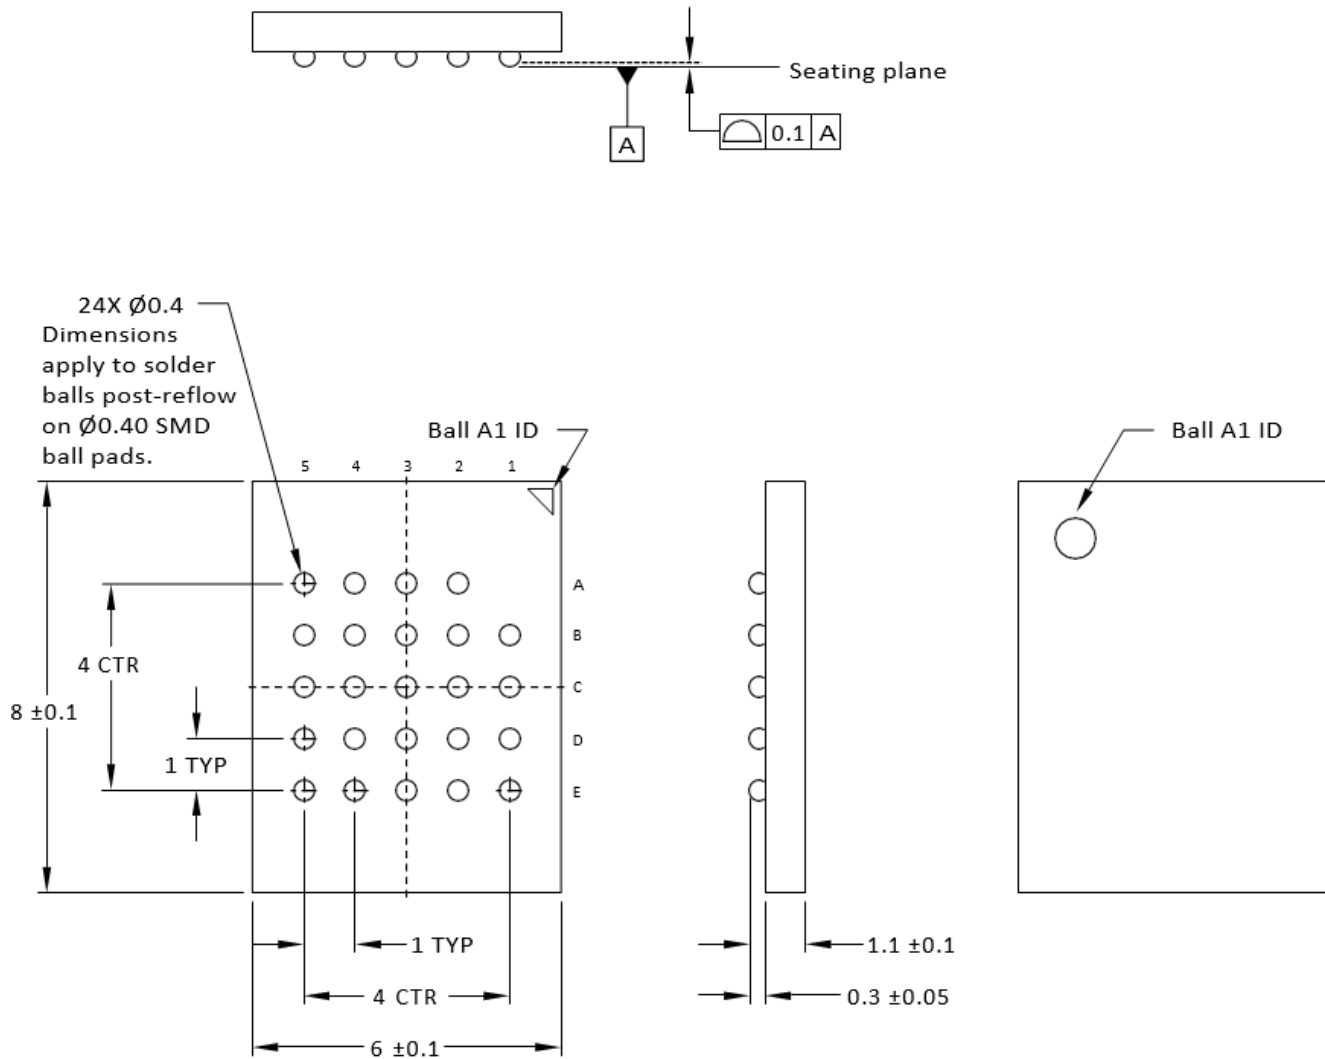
PACKAGE OUTLINE 6X8MM 24-BALL BGA
